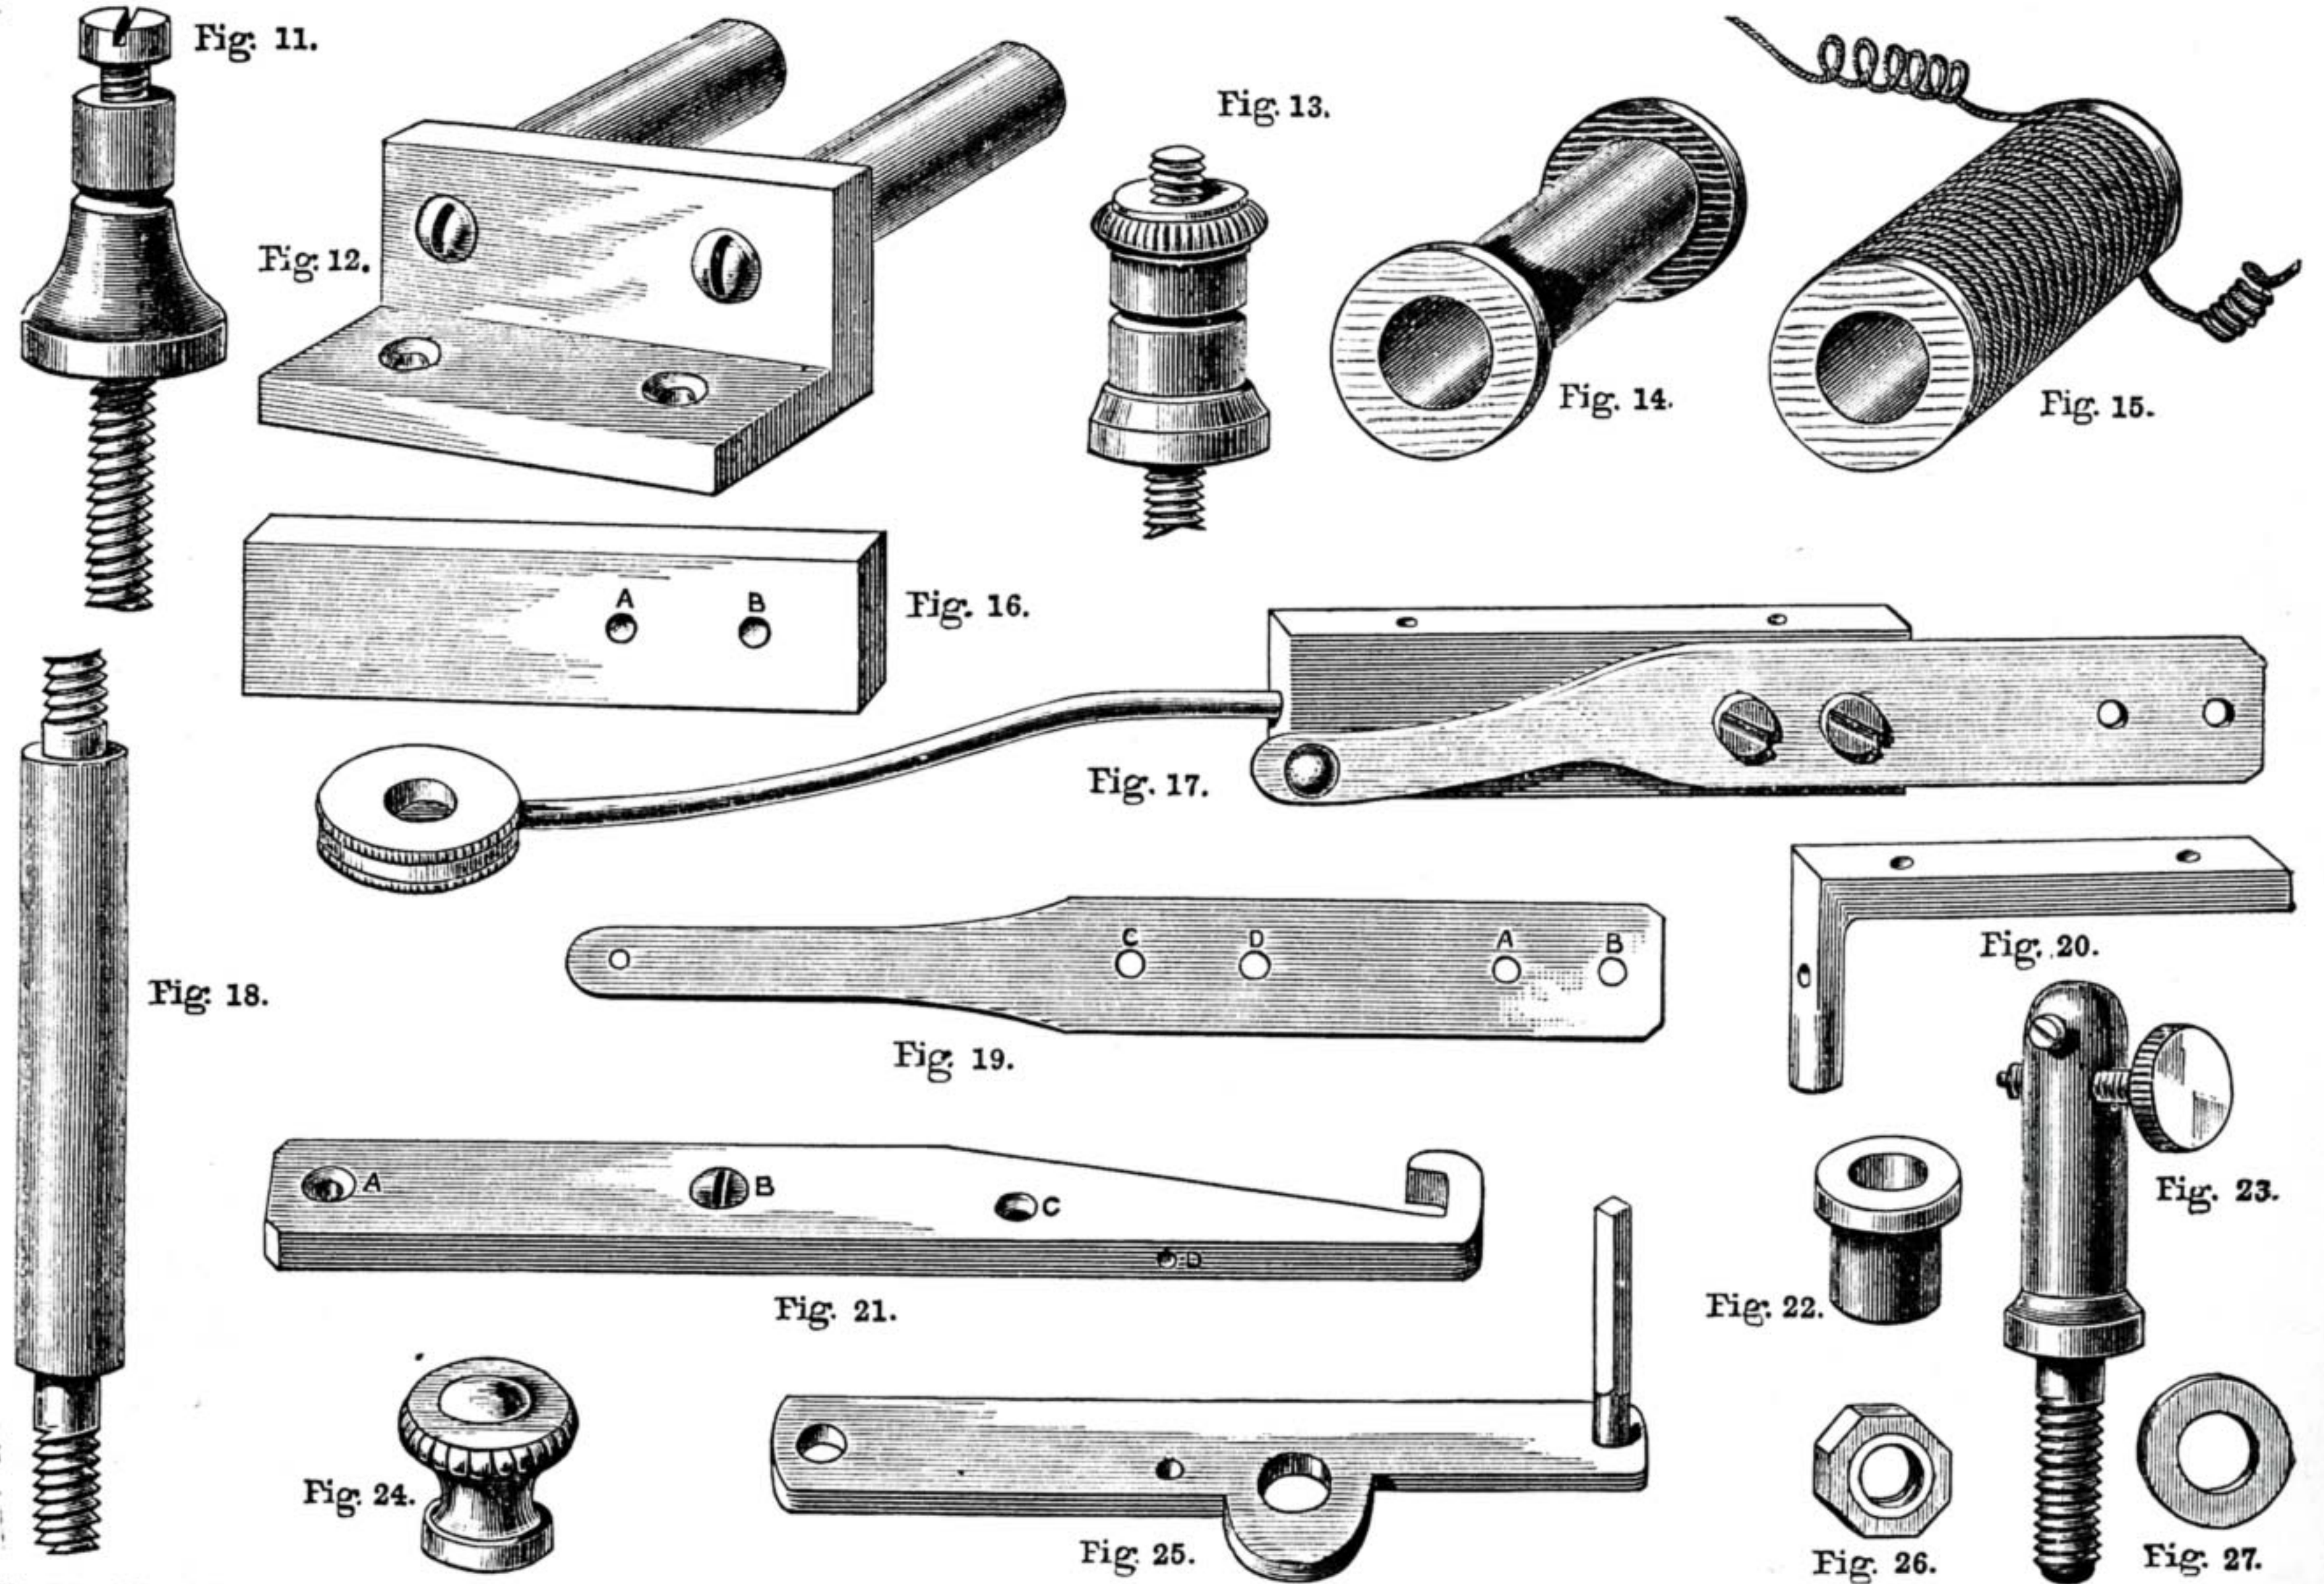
Pivot Pillar for Trigger. Fig. 12.—Magnet attached to Yoke. Fig. 13.—Binding Screw: Telegraph Form. Fig. 14.—Wood Bobbin for Electro-Magnet Core. Fig. 15.—Bobbin Wound with Silk-Covered Wire. Fig. 16.—Iron Armature. Fig. 17.—Armature, Spring Hammer, and Shaft Connected. Fig. 18.—Bell Pillar. Fig. 19.—Armature Spring. Fig. 20.—Brass Catch for Trigger of Relay. Fig. 21.—Trigger for Relay. Fig. 22.—Insulating Collar for Pillar. Fig. 23.—Contact or Break Pillar. Fig. 24.—Nut for Top of Bell Pillar. Fig. 25.—Another Form of Relay Trigger. Fig. 26.—Brass Nut. Fig. 27.—Brass Collar.
